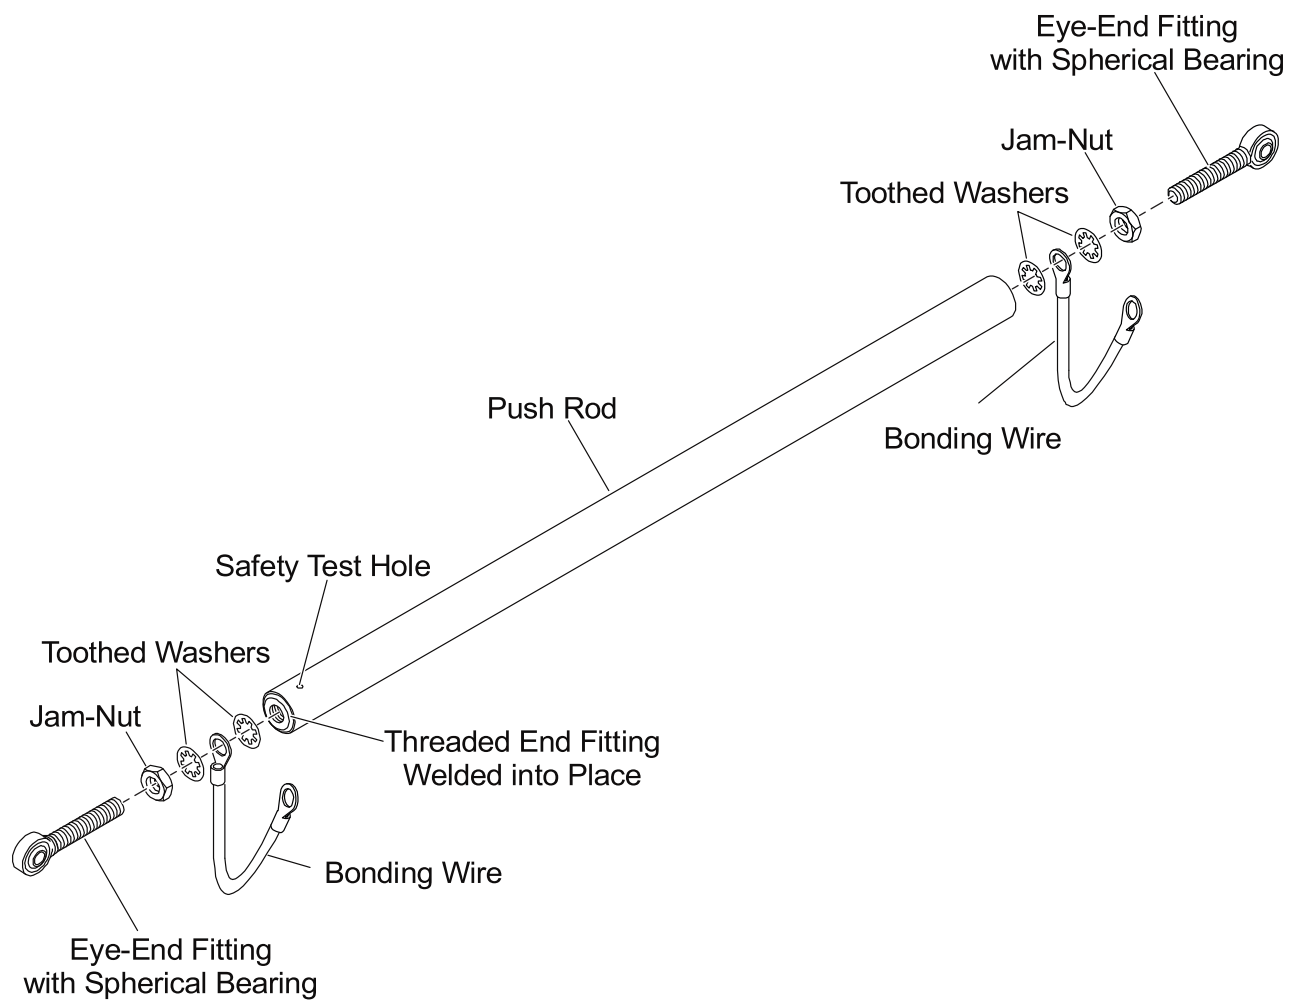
shows an example of a standard pushrod. The rod has adjustable end fittings. The adjustable fittings have eye ends with a threaded shaft. The eye end has a spherical self-aligning bearing. A jam nut on the threaded shaft locks the eye end in position. Toothed washers lock the nut. You can turn the eye ends to adjust the length of the pushrod.
